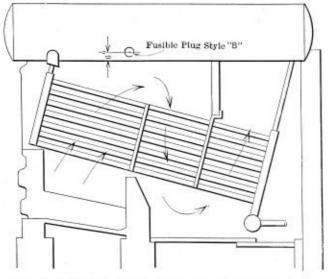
Watertube Boiler—Horizontal Drum Babcock & Wilcox Type
